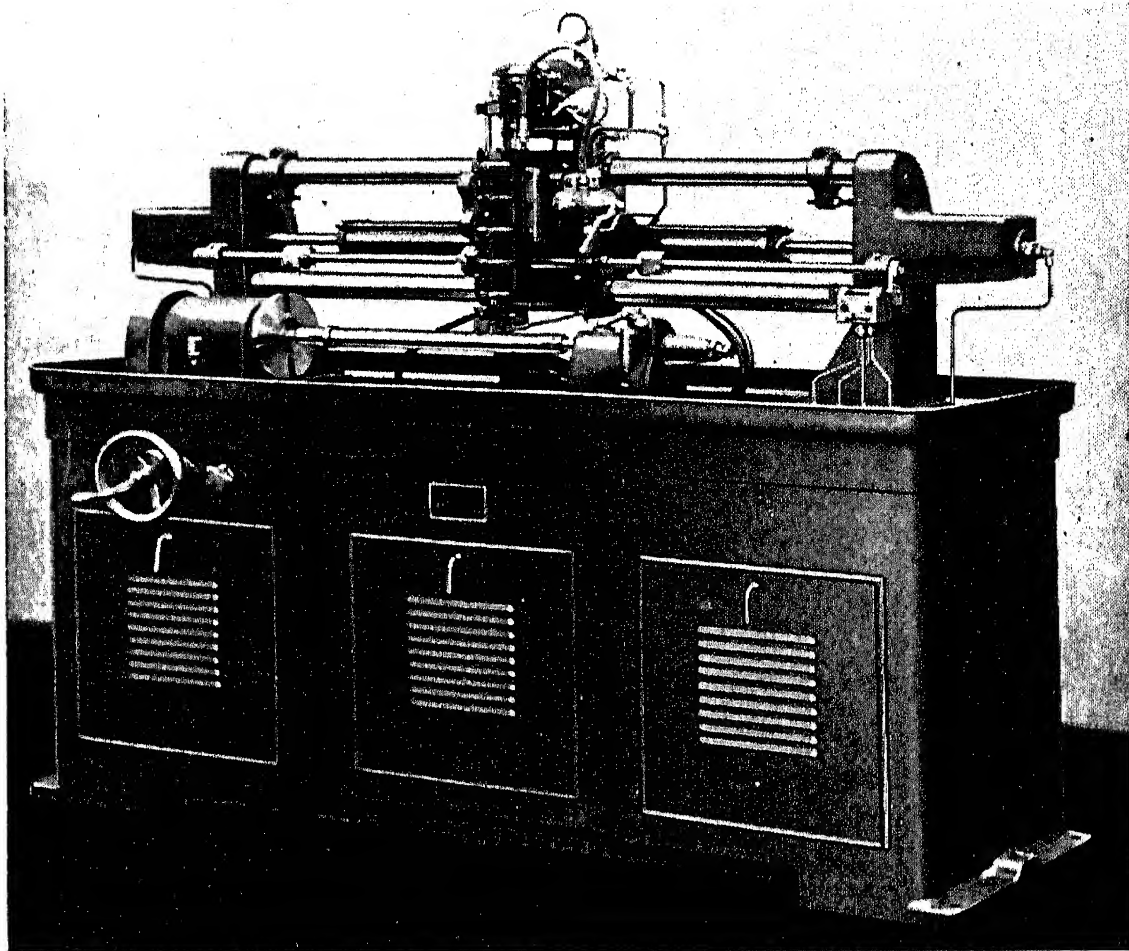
A 4 in. by 36 in. general purpose cylindrical Superfinisher. (Courtesy Gisholt Machine Co.)
